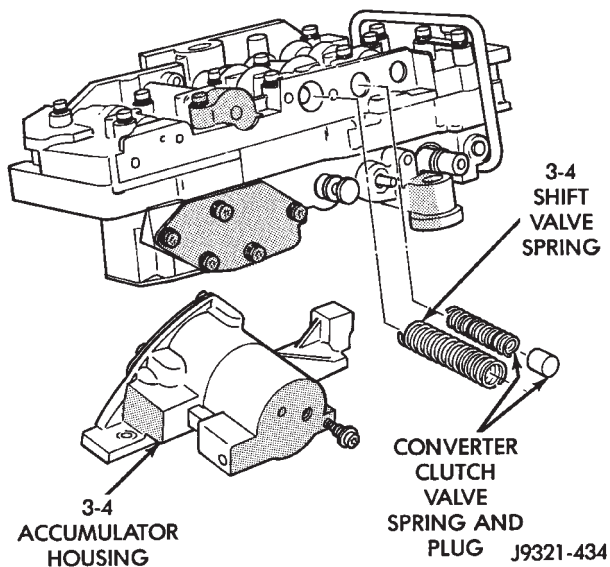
3-4 Accumulator Housing, Valve Springs And Plug Removal
